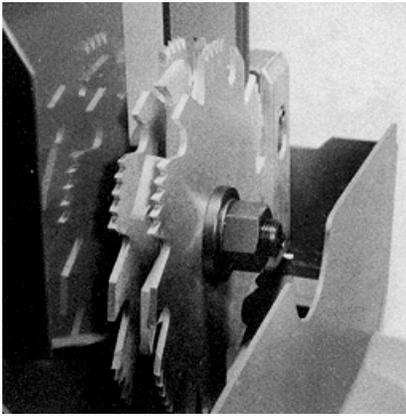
The dado accessory mounts on the 5/8" molder/dado arbor which is then locked to the MARK V's main spindle.
